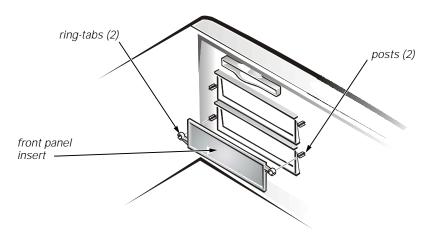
5.25-Inch Front-Panel Insert Removal
